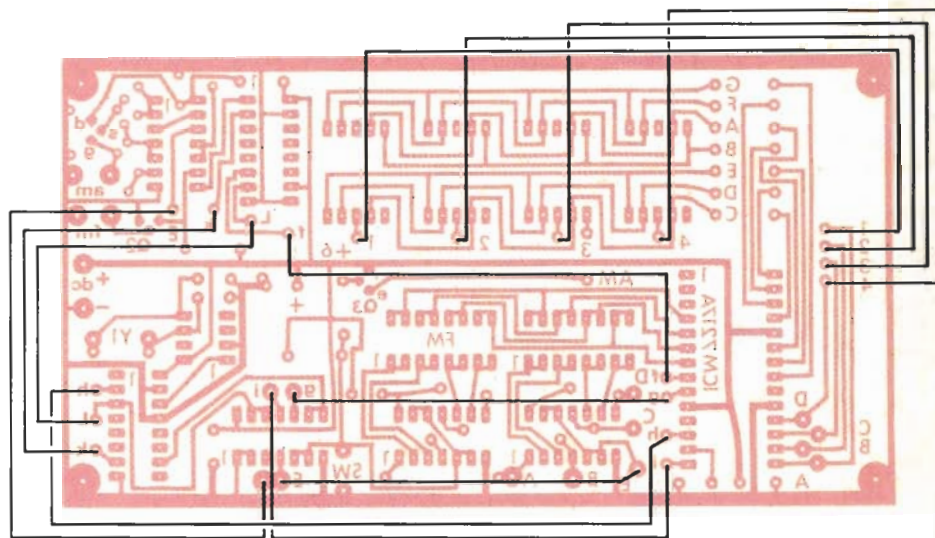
At left and below are additional jumpers of insulated wire to be installed on the display board. Use RG-174 coaxial cable to make the connections off the board.
